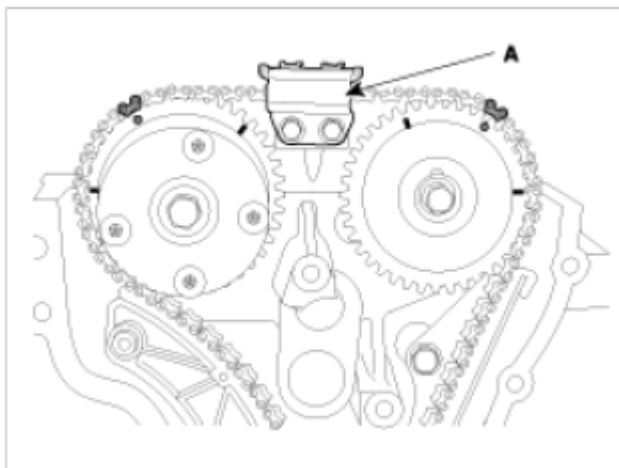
Identifying LH Timing Chain Tensioner Arm And Chain Tensioner
